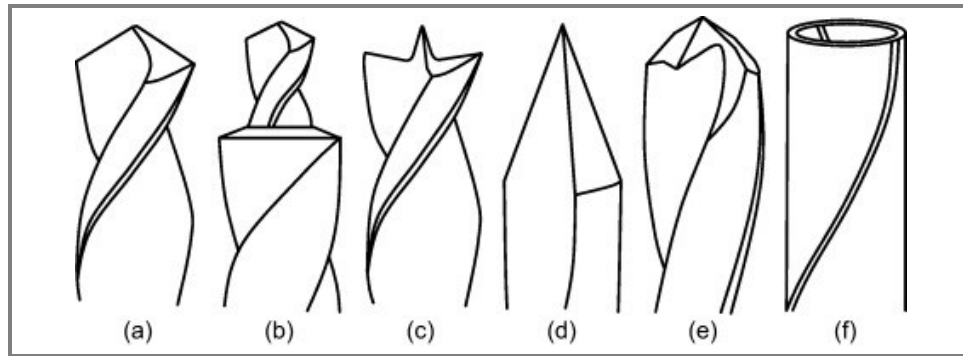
Tools used on CFRP drilling: a) standard twist drill; b) step drill; c) W-shape drill; d) straight flute drill; e) multifaceted drill; f) core drill [134]
